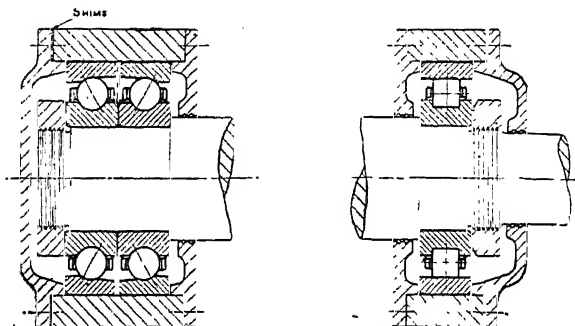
Ball bearings preloaded and adjusted by means of shims.
